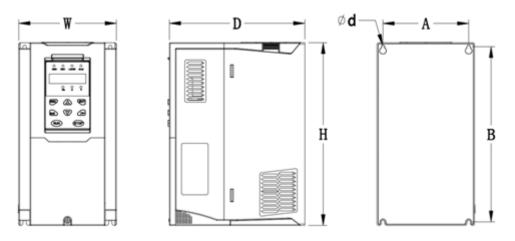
SIZE A to SIZE C(0.75KW-15KW) Dimension
